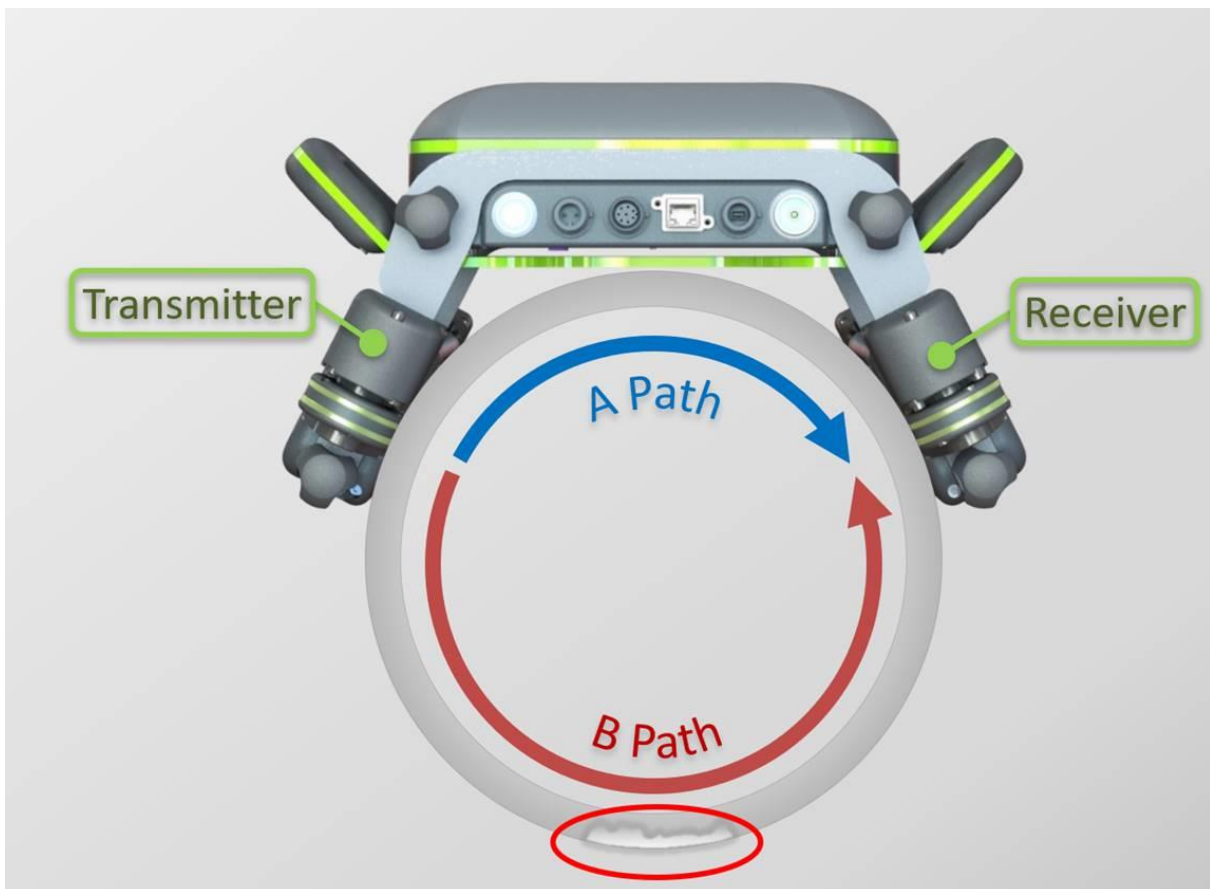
Schematic of the configuration of QSR1 (courtesy GUL)
